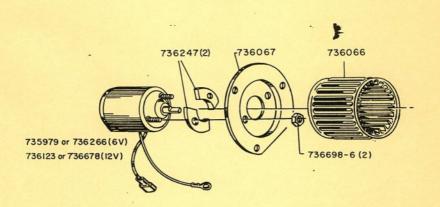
VENTILATING AIR BLOWER & MOUNTING PLATE ASSEMBLY 736065 USED ON KIT MODELS 736076-8330-8331-8332-8333-8334
